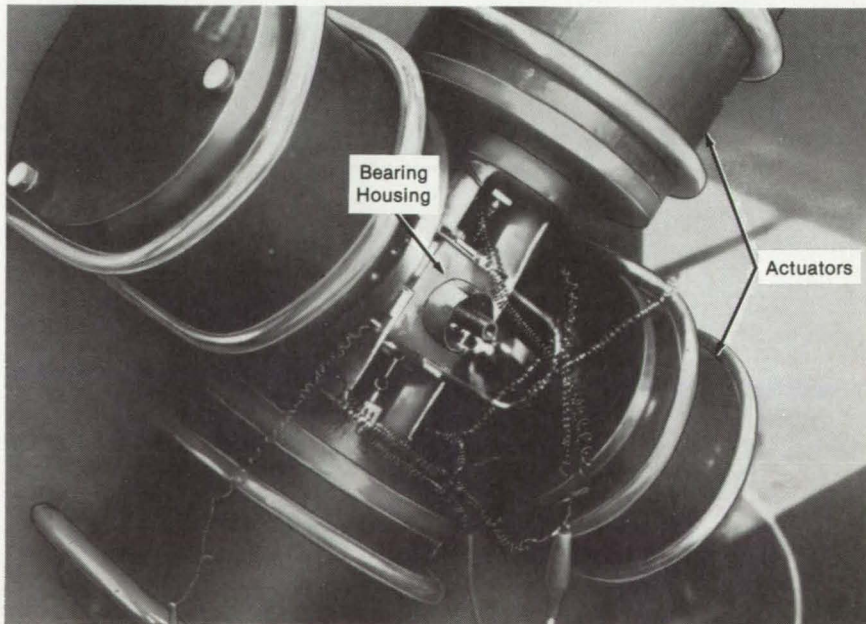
Four Actuators support the bearing housing at each end of the rotor shaft and exert the control forces on the housing.
